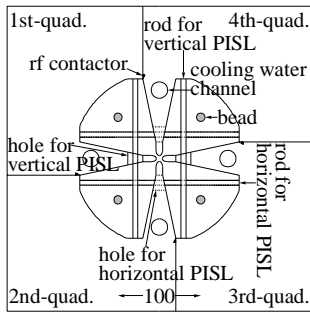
Schematic drawing of cross-sectional shape of the RFQ cavity.
